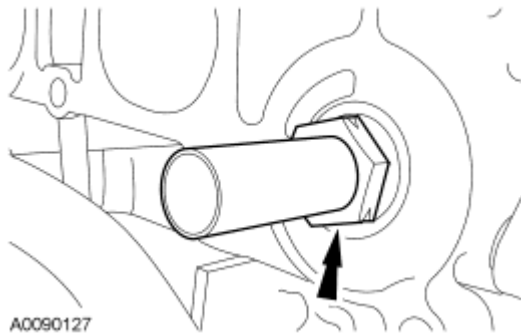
Locating Exhaust Gas Recirculation (EGR) Tube
